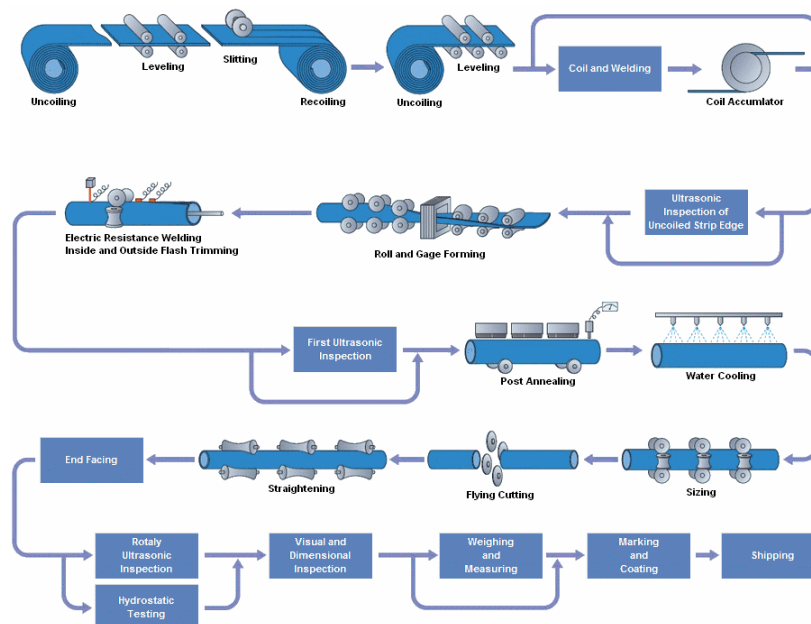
Schematics of the Electric Resistance Welding (ERW) process showing the different stages the pipe goes through [13].
